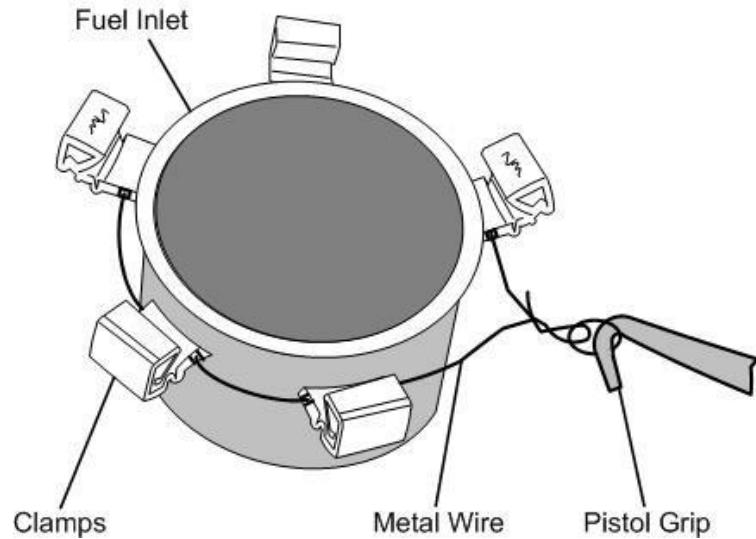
Securing Clamps on the Short Neck Inlet
